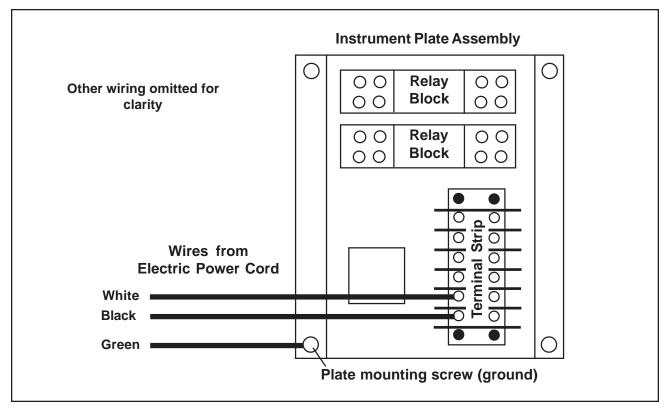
Electric Power Cord Wire Connections to the Instrument Plate Assembly
